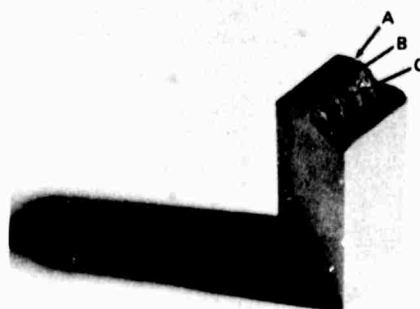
Fracture face of longitudinal-transverse specimen failed in methanol. Fatigue crack at A; ductile failure at B; cleavage near preferred basal planes at C.
